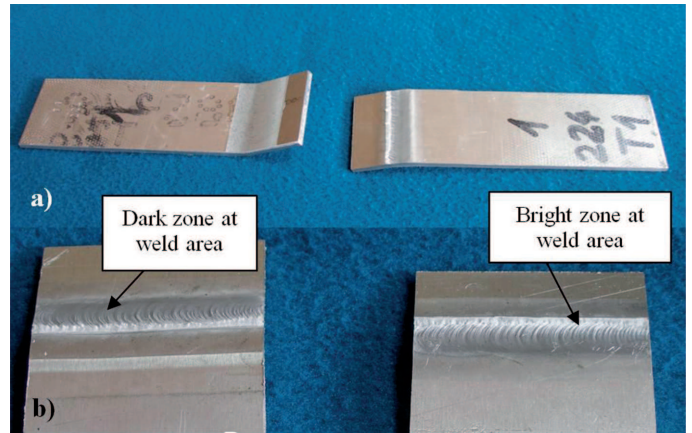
Fractures of lap joint Triflute tool welded with linear welding speed of 224 mm/min; a) main view; b) surface view at the place of fracture
